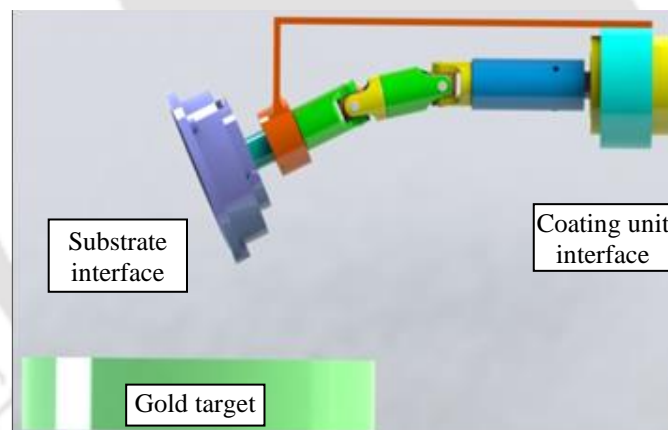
3D model of glancing mechanism in coating machine for 3D coating
